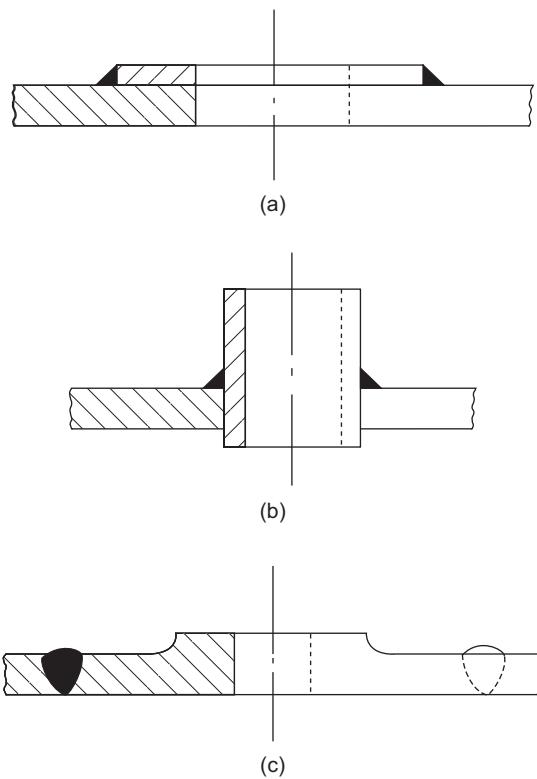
Types of compensation for openings. (a) Welded pad. (b) Inset nozzle. (c) Forged ring.
